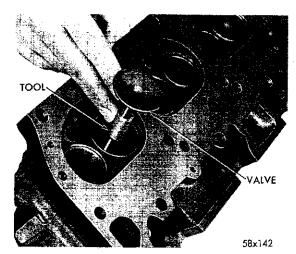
Measuring Valve Stem Guide Clearance Using Tool C-3026
